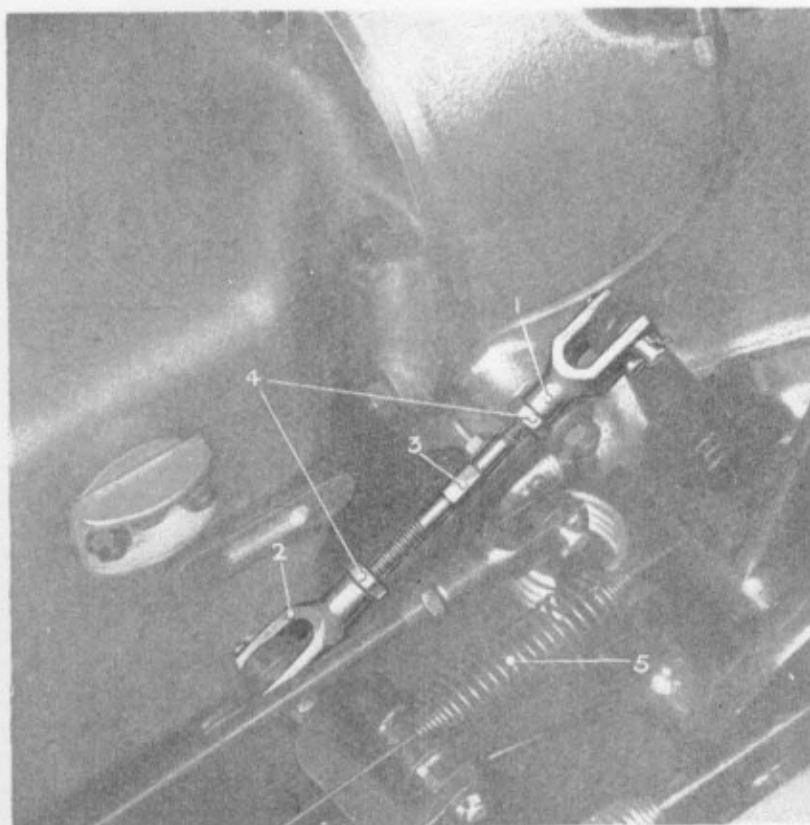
ADJUSTMENT CLUTCH PEDAL
